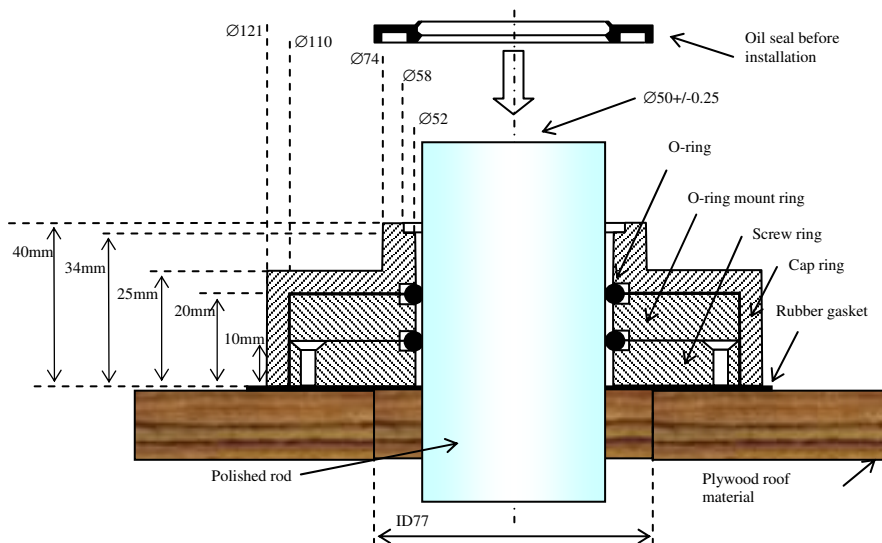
22: Sectional drawing of compact, modular rod mounting
